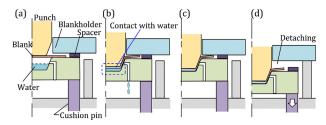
Cooling of blank in hot stamping using water and die quenching. (a) Start, (b) stamping and (c) holding at bottom dead centre.
